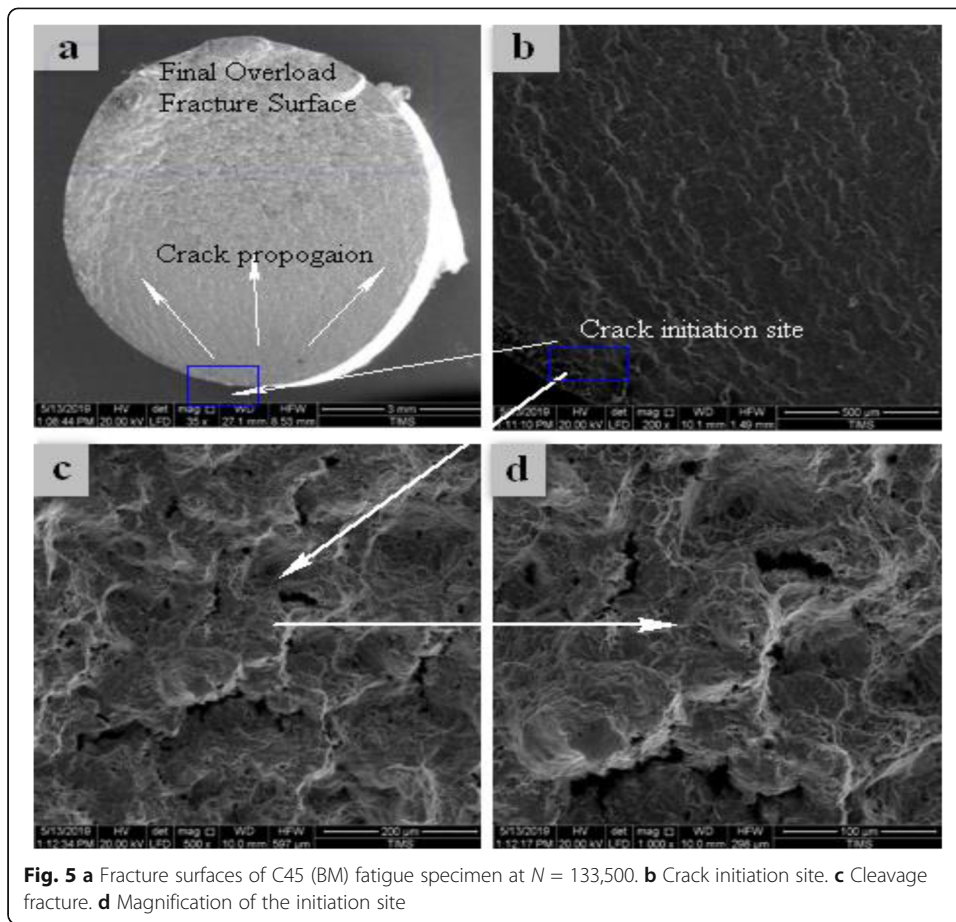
a Fracture surfaces of C45 (BM) fatigue specimen at $N = 133,500$. b Crack initiation site. c Cleavage fracture. d Magnification of the initiation site
